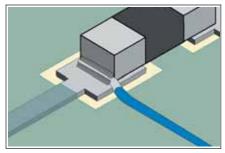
AcceptableWire soldered topad, parallel or perpendicular to component.
